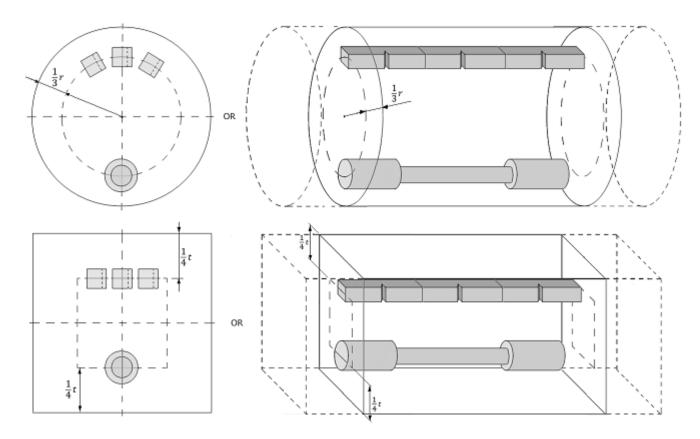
Position of test pieces in round and square/rectangular sections. Alternatively, the three Charpy V-notch test pieces may be taken in series.
